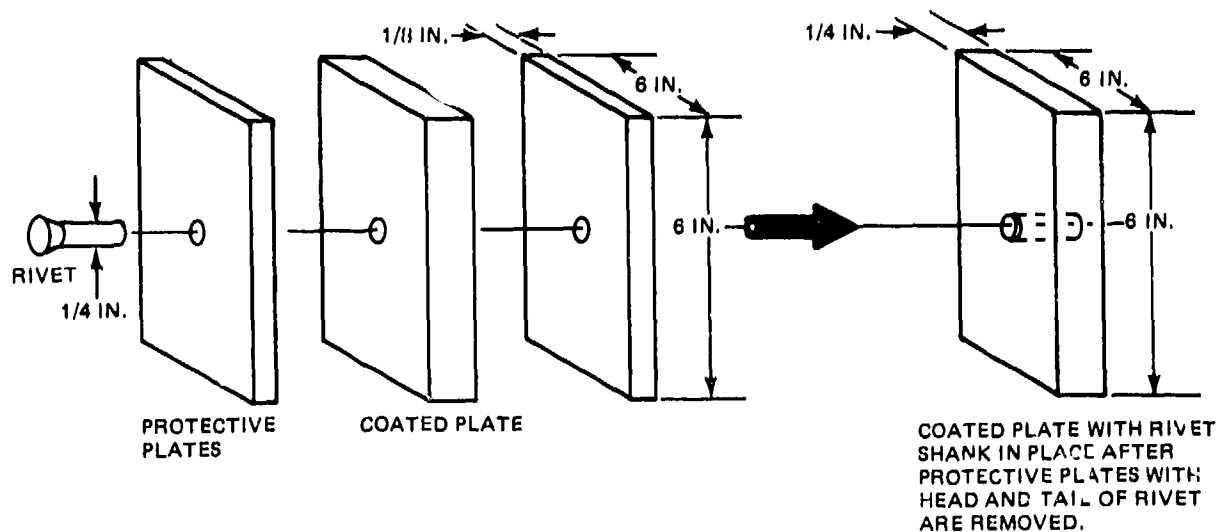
Specially Designed Specimen for Measuring Residual Strain Using Moiré Technique
